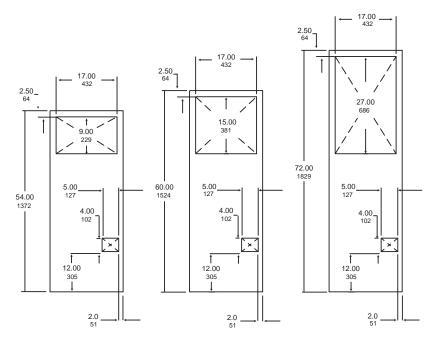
Bottom Conduit Entrance-Auxiliary Section (36-inch wide)
